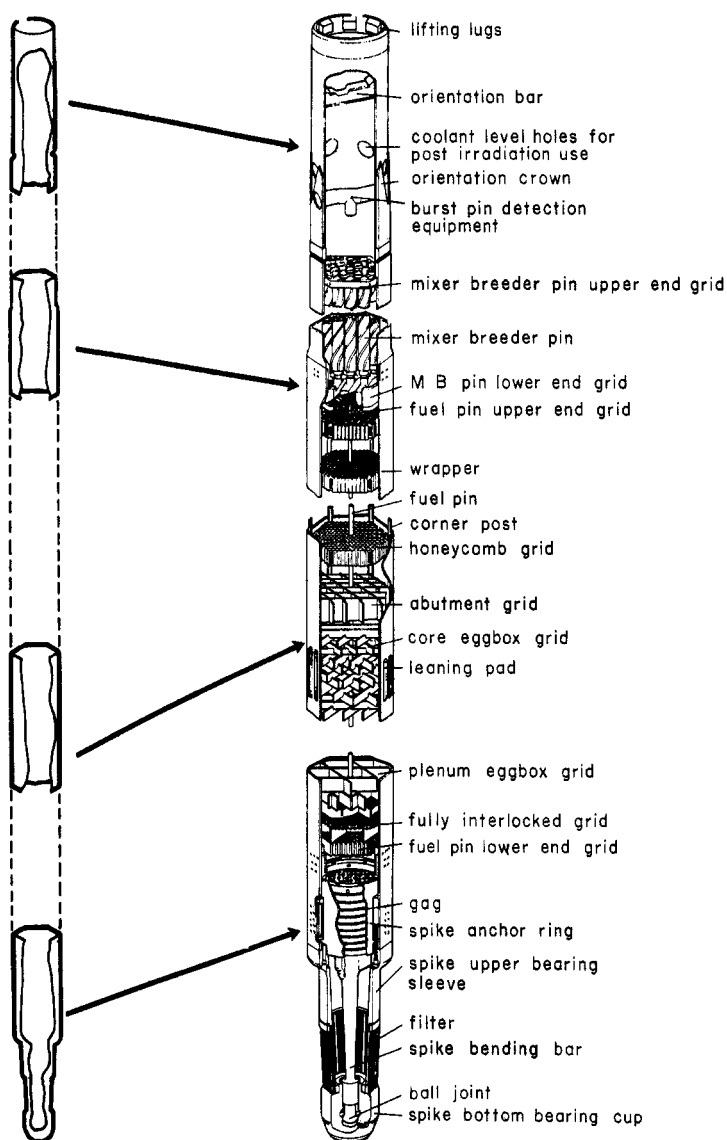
Arrangement of PFR fuel assembly. (After Ref. 2.)
